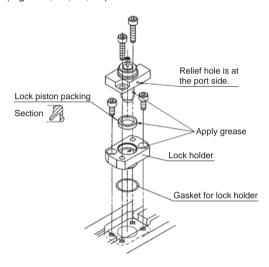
Reassembling of end lock part (Ø20, Ø25)
